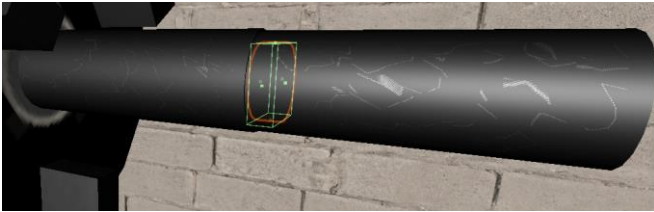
A slice of the workpiece used to detect cutting tool contact.
